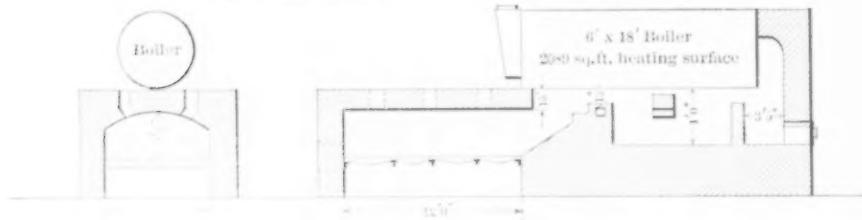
A TAN FURNACE WITH SIX FEED HOLES
